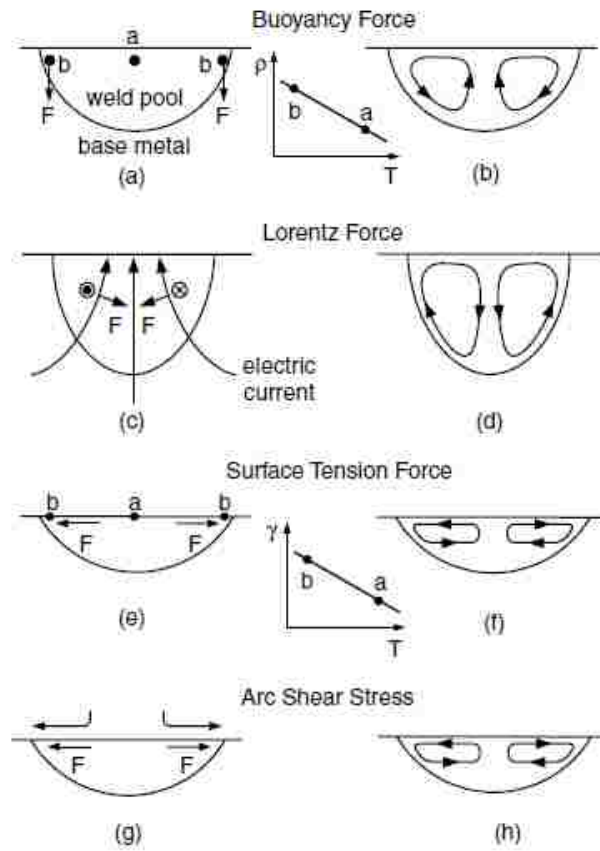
The driving forces for weld pool convection [20]
